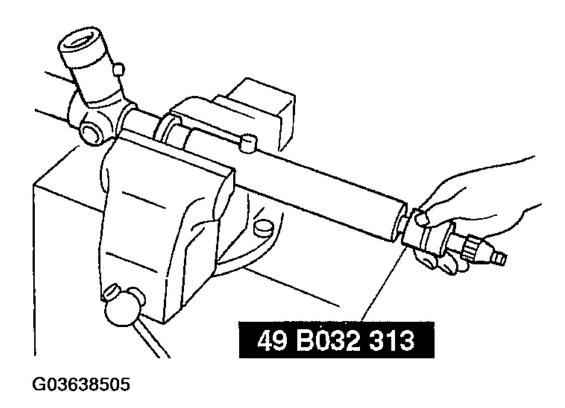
Assembling Holder Courtesy of MAZDA MOTORS CORP.
